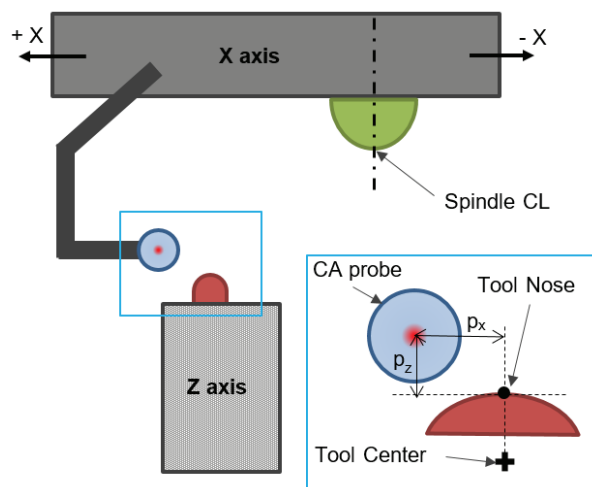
Schematic showing the spindle and probe mounted to the X axis and the tool to the Z.
